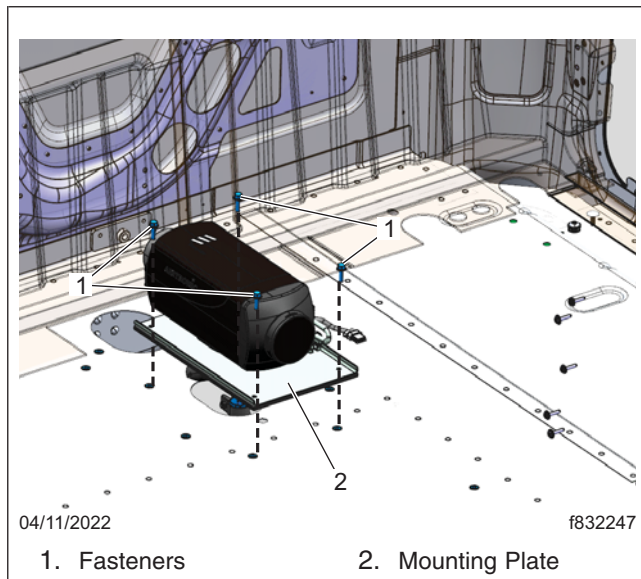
, Aligning the Auxiliary Heater Mounting Holes with the Sleeper Floor
